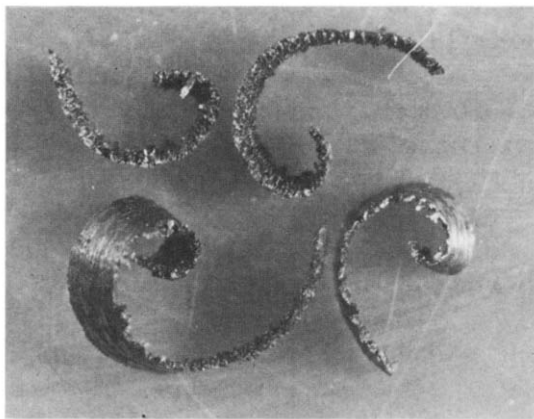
Macrograph of chips obtained on turning cast iron with Ce-TZP tool.
